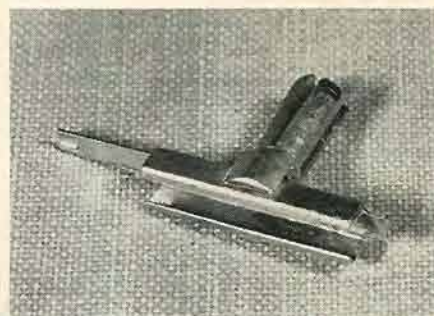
Stylus assembly holder has one leg cut off to clear pole pieces.
